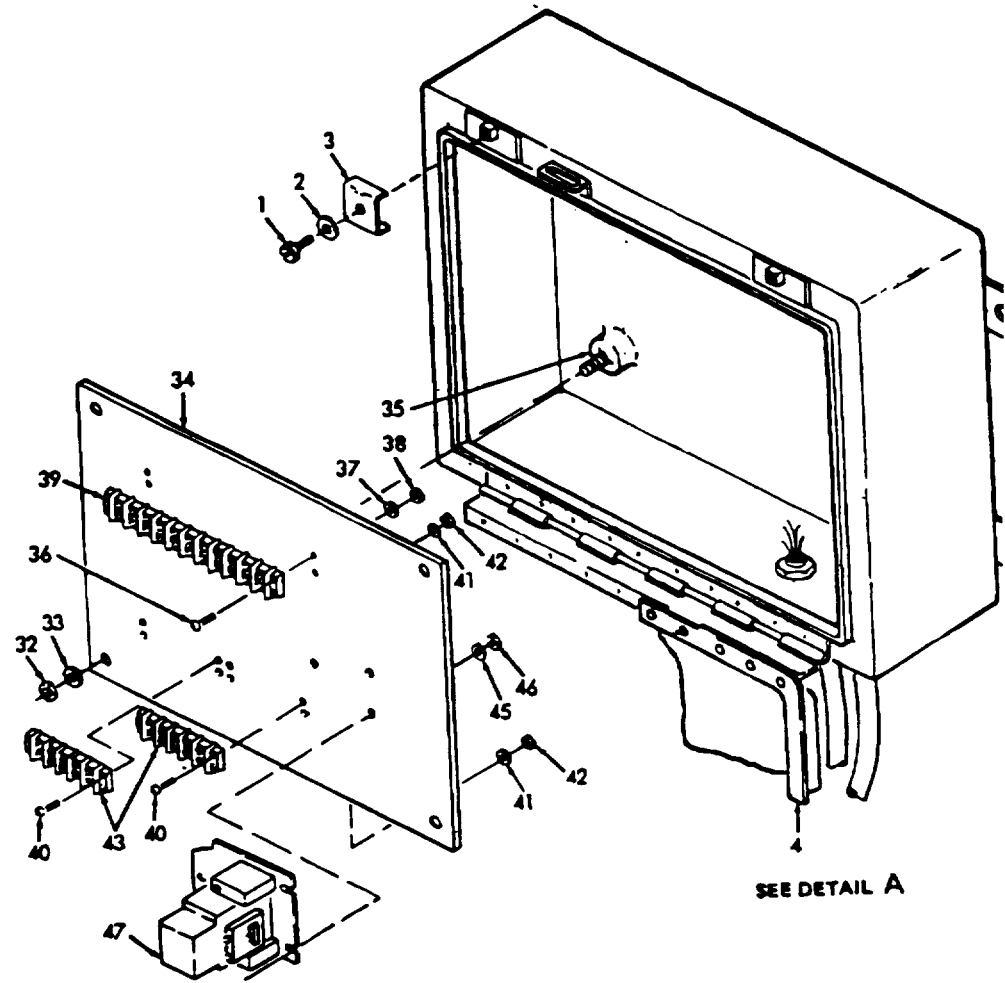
Control Panel Assembly, Disassembly/Assembly (Sheet 2 of 2).
